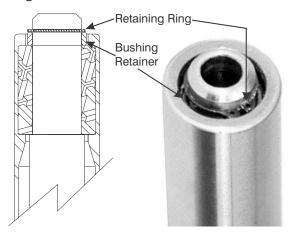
Install Bushing Retainer and Retaining Ring.
